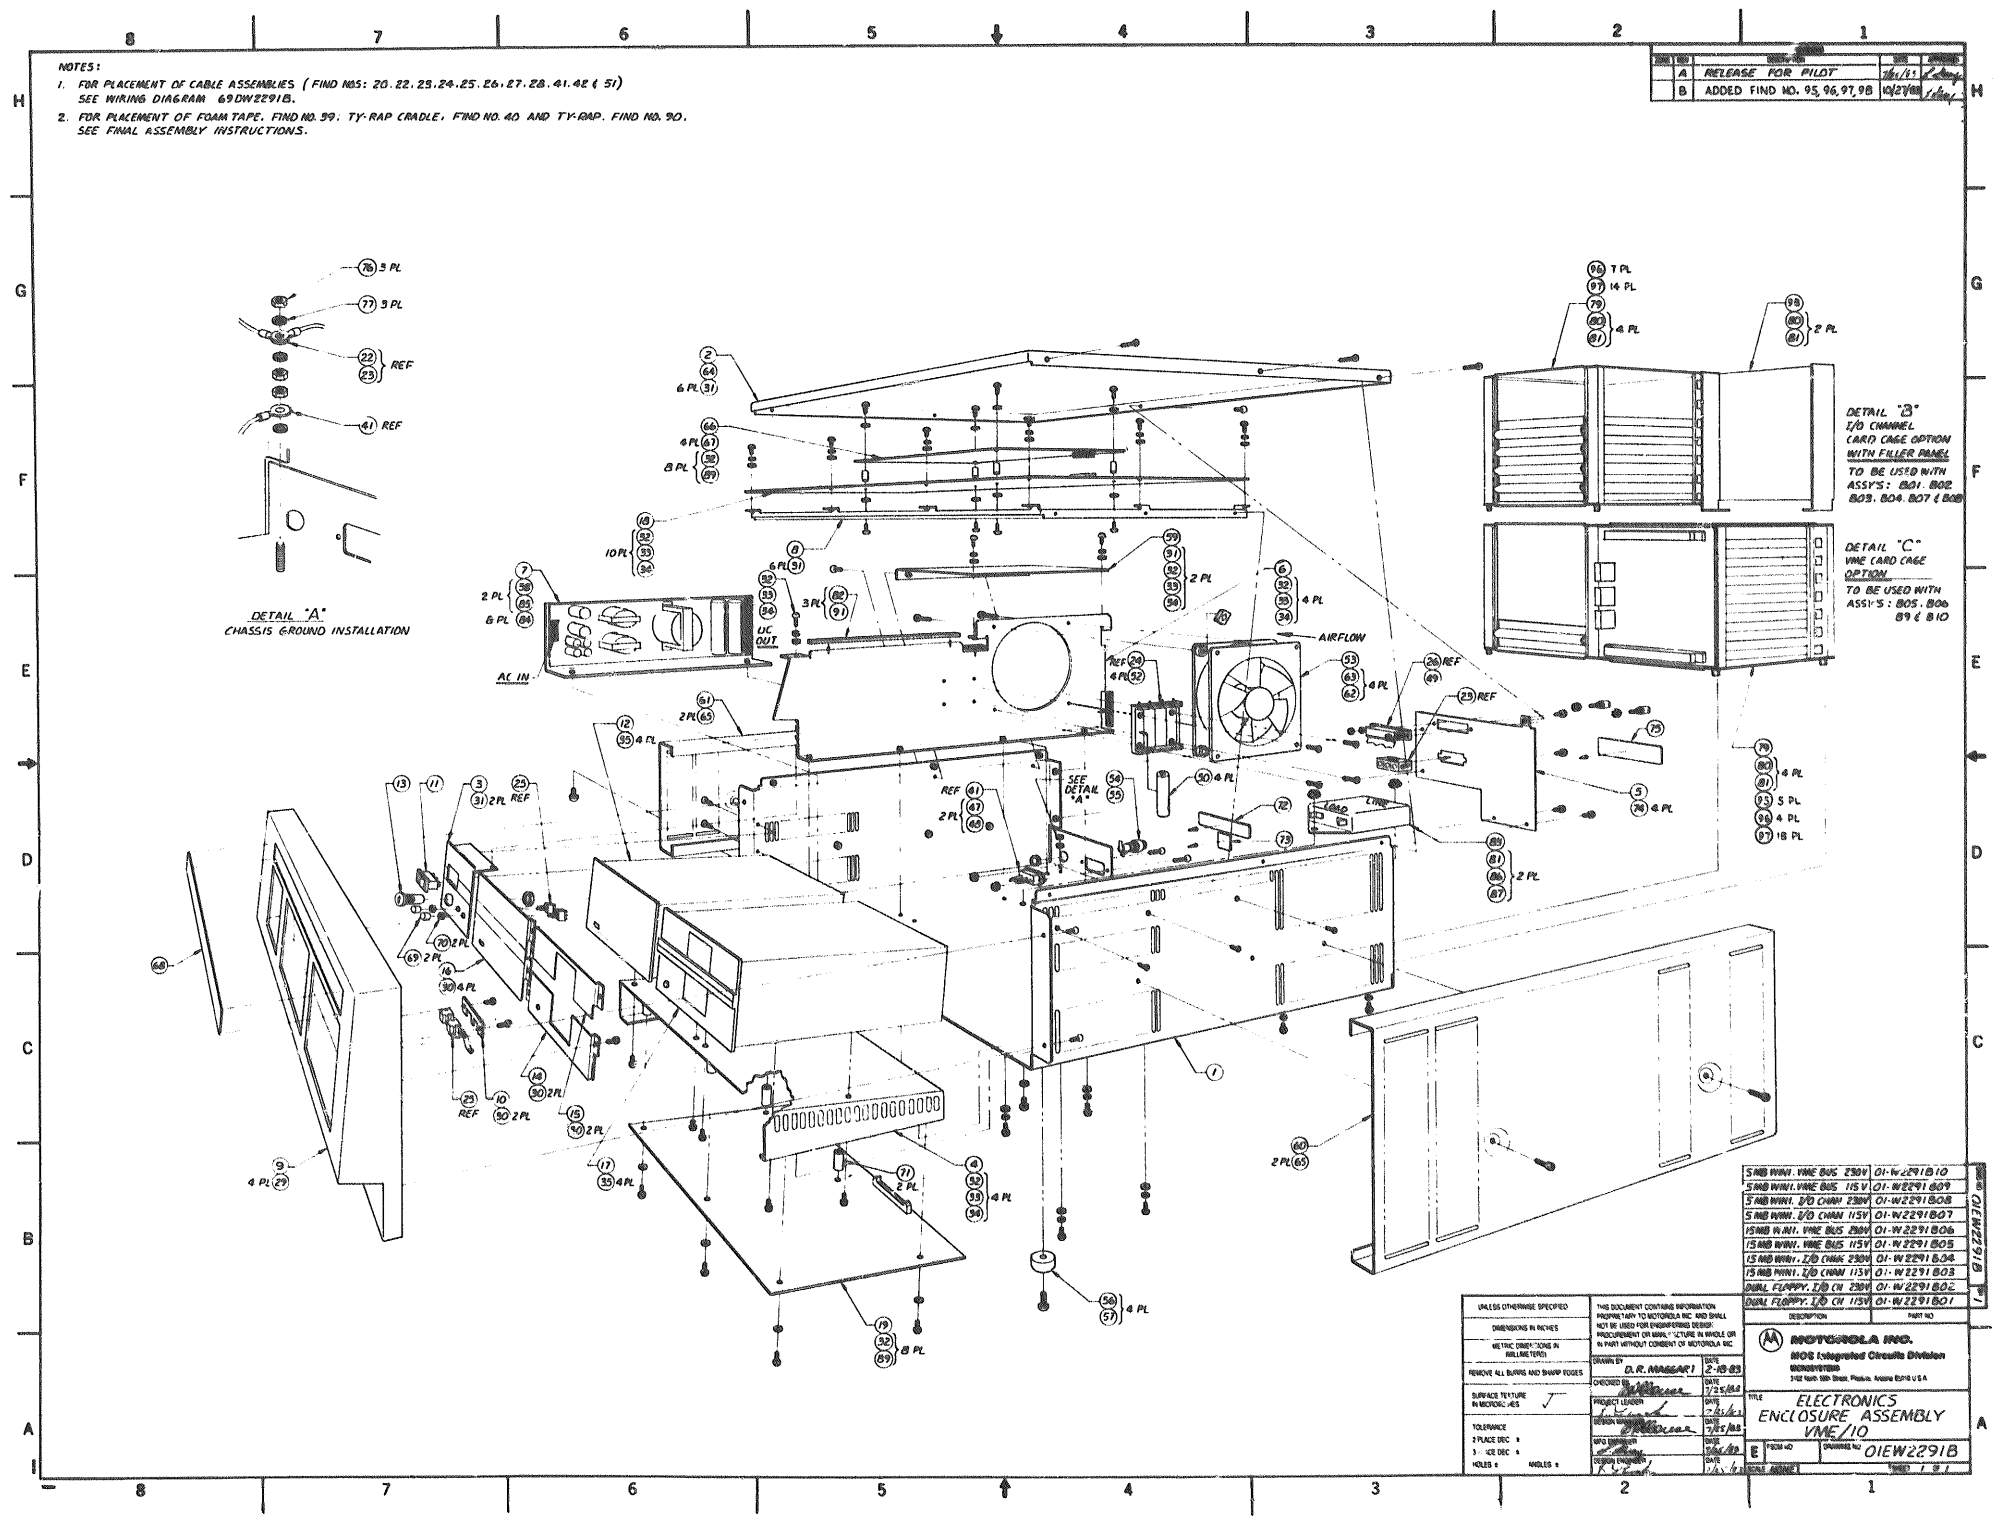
Control Unit Chassis Assembly Diagram
